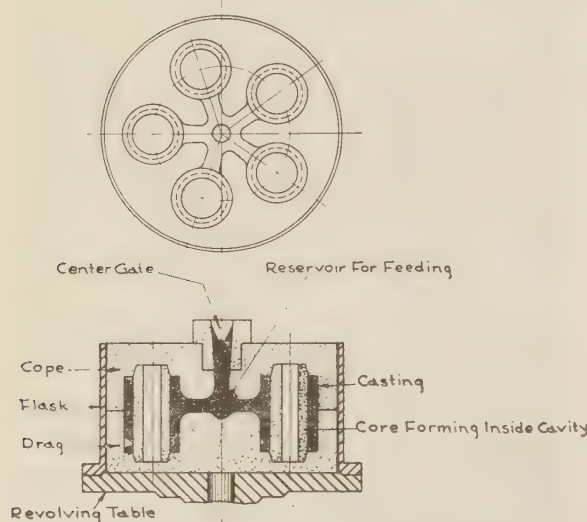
CENTRIFUGE CASTING OF BOGIE-WHEEL HUBS
